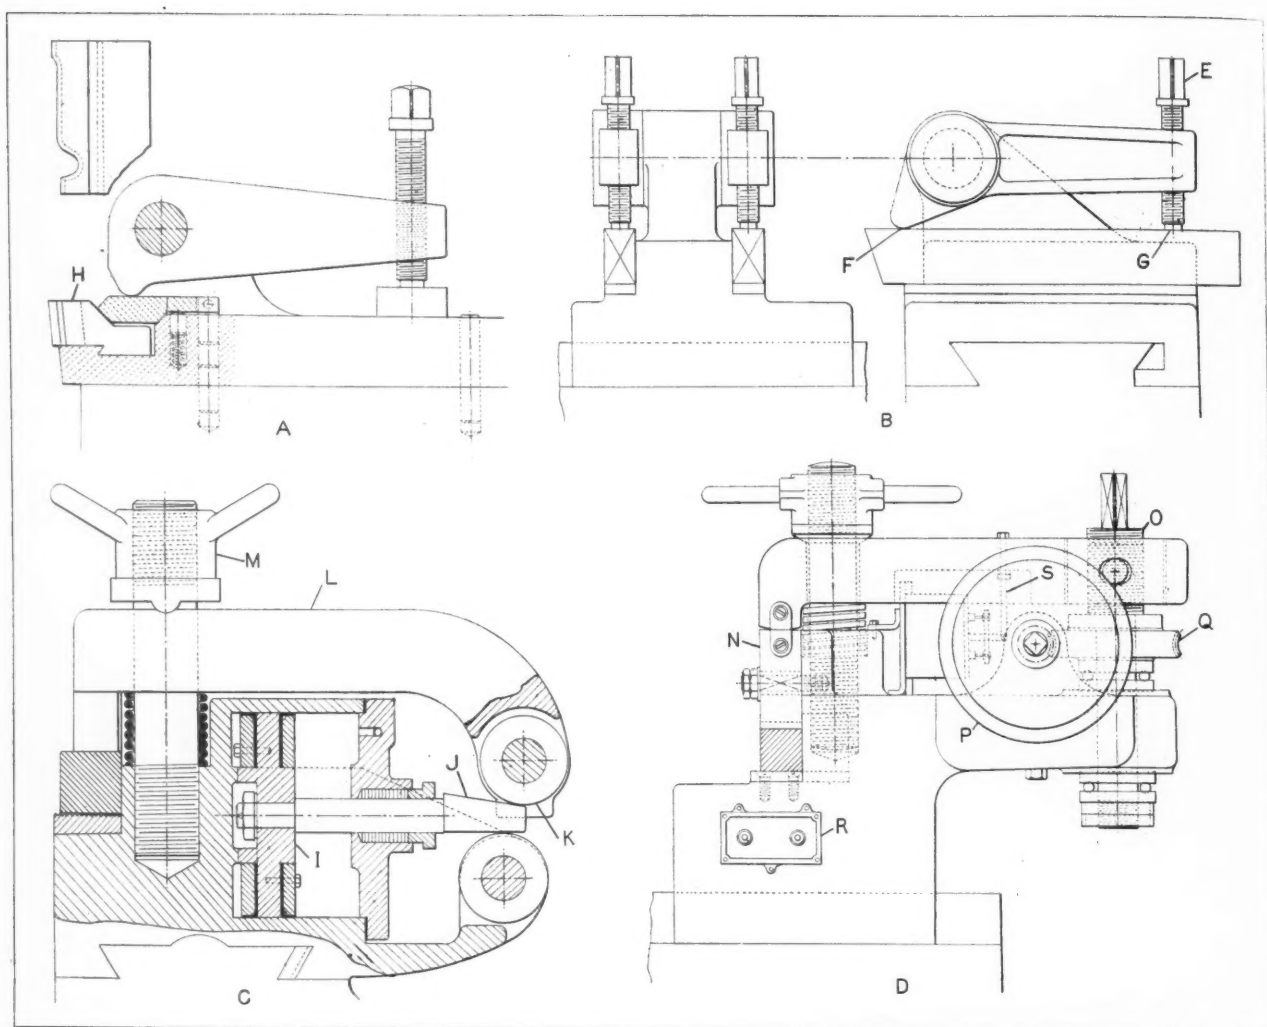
(A) Clamp for Holding Form Tools; (B) Duplex Holder with Lever Clamps; (C) Air-operated Wheel Lathe Tool Clamp; (D) Electrically Operated Clamp for Wheel Lathe
